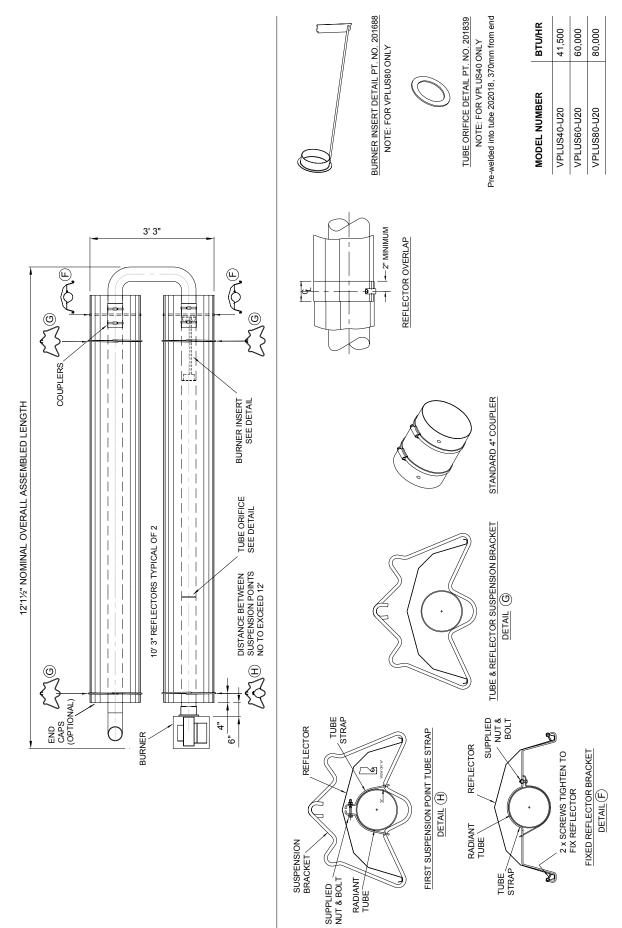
VPLUS Heater Assembly: Model U tube 40-U20, 60-U20 and 80-U20.
